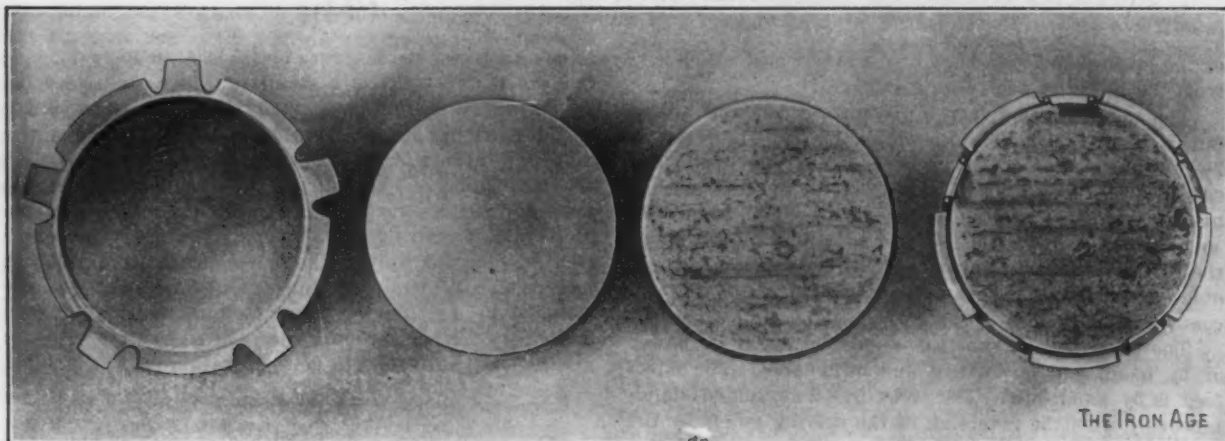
Views Showing the Three Parts and a Completed Bottle Cap.
